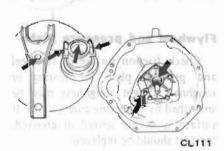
Lubricating Points of Withdrawal Lever, Bearing Sleeve and
